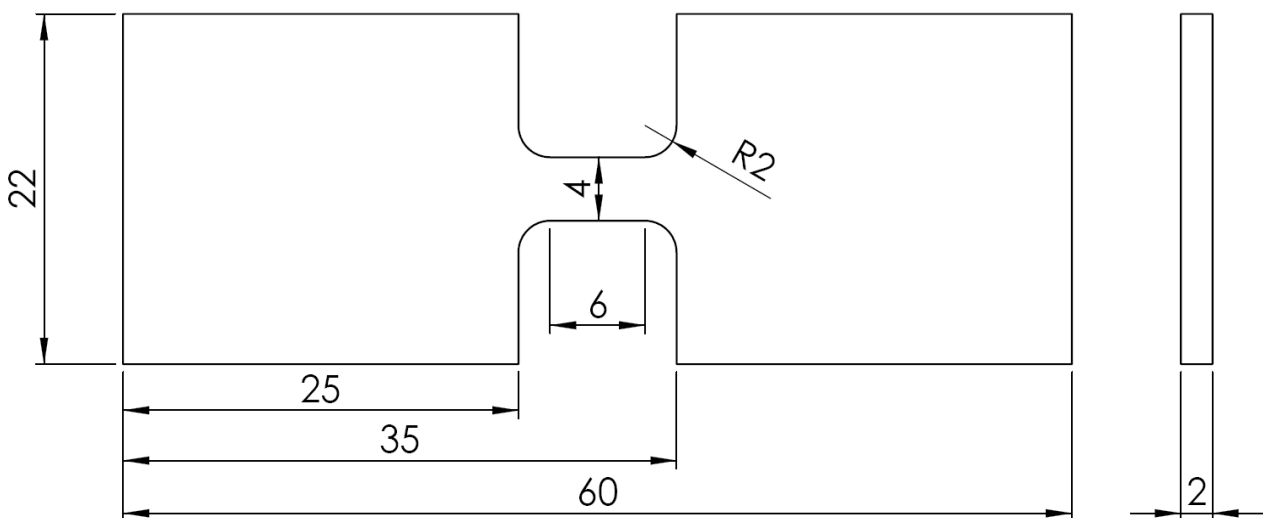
Geometry of tensile test sample. All dimensions in millimetres.
